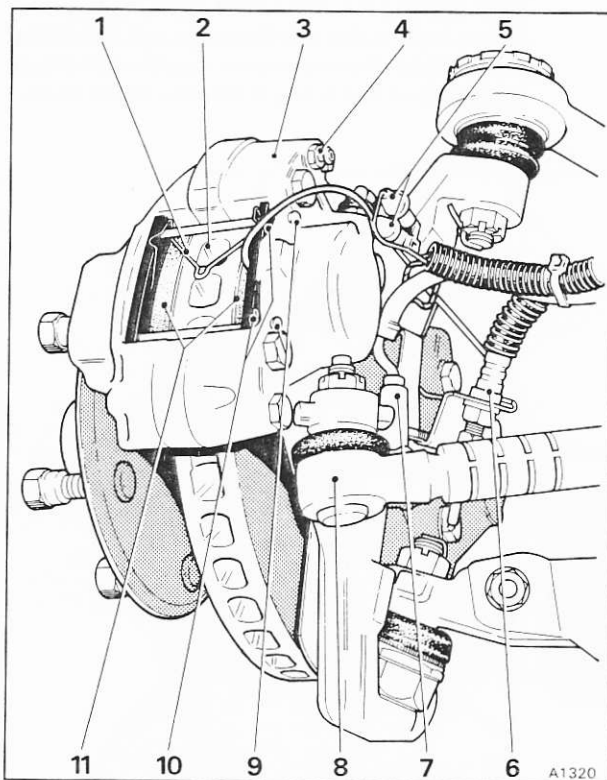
Front wheel brake caliper (cars fitted with anti-lock braking)
